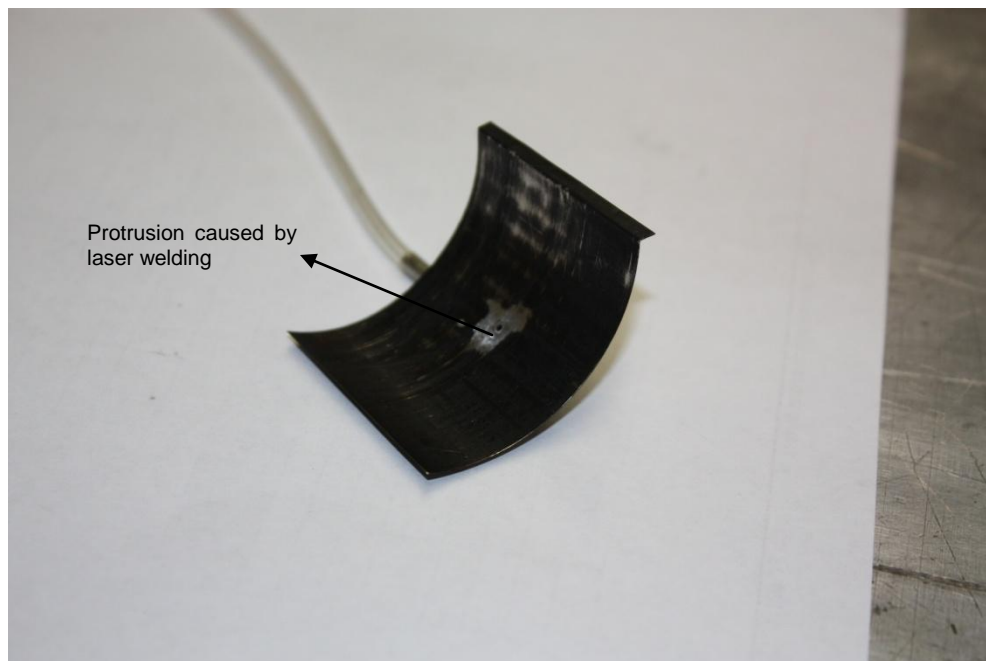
Top Foils with laser welded orifice tubes showing rubbing marks and protrusion at the air injection area
